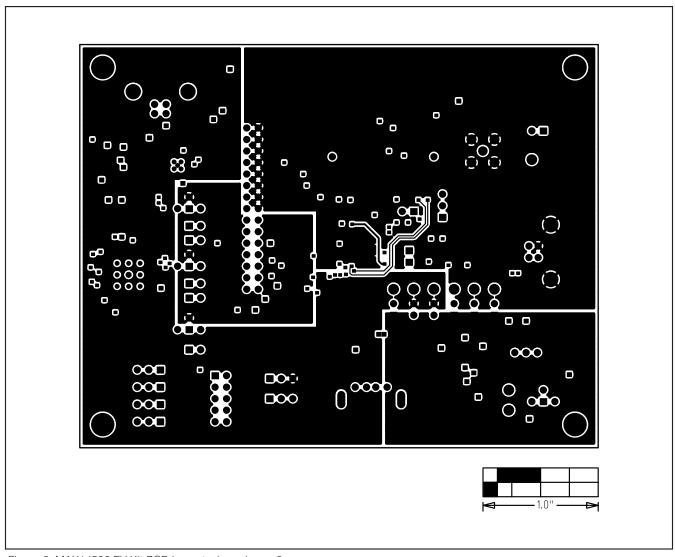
MAX14502 EV Kit PCB Layout—Inner Layer 3
